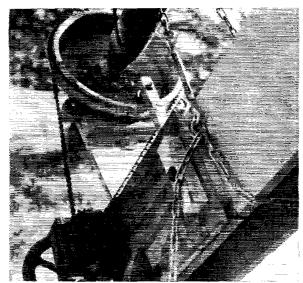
Outer lower bearing assembly has four skatewheel bearings. The brake-drum surface rides on the middle wheel, and the rim of the drum against the other two on its outer surface. It is held in alignment by another on the inner surface.
